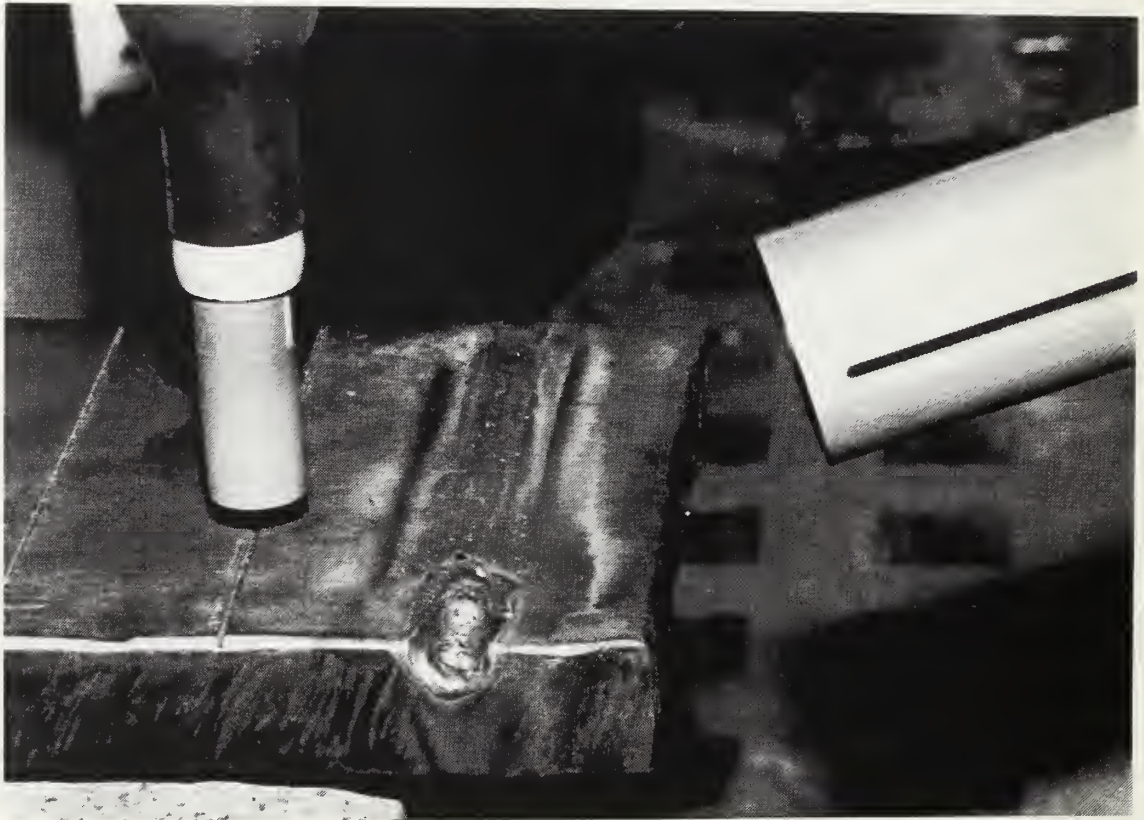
Camera Unit, Torch, and Weldpiece Set-up.
